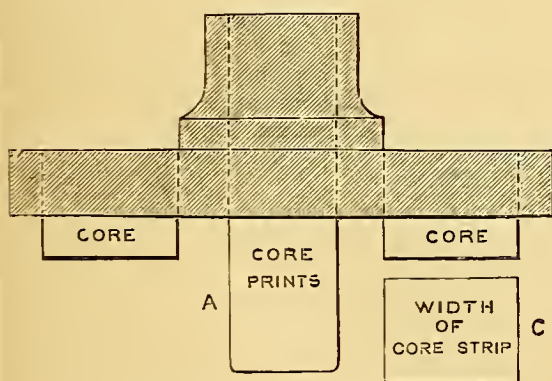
SECTION AND ELEVATION OF FACE PLATE.
